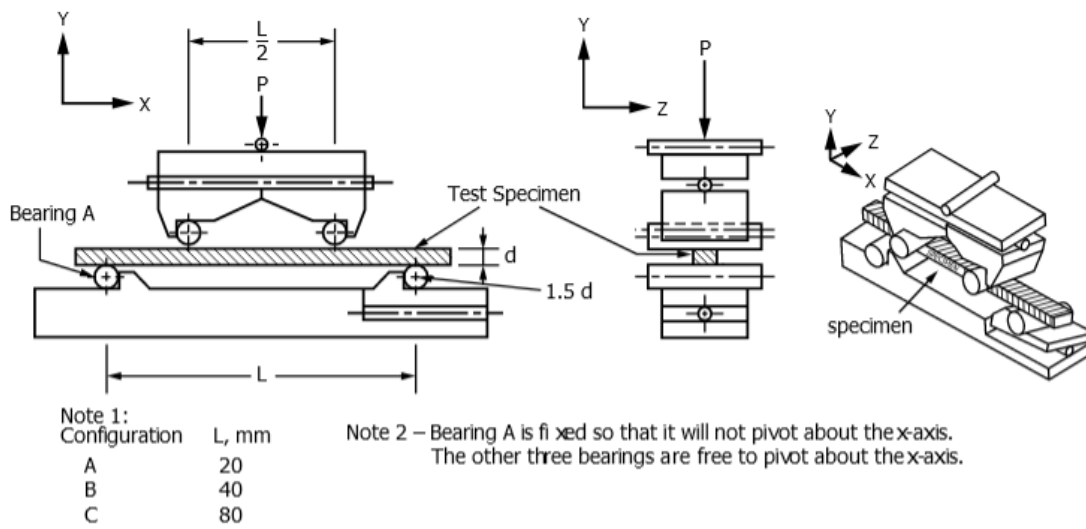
ASTM diagram of fully articulating four-point bending fixture.
